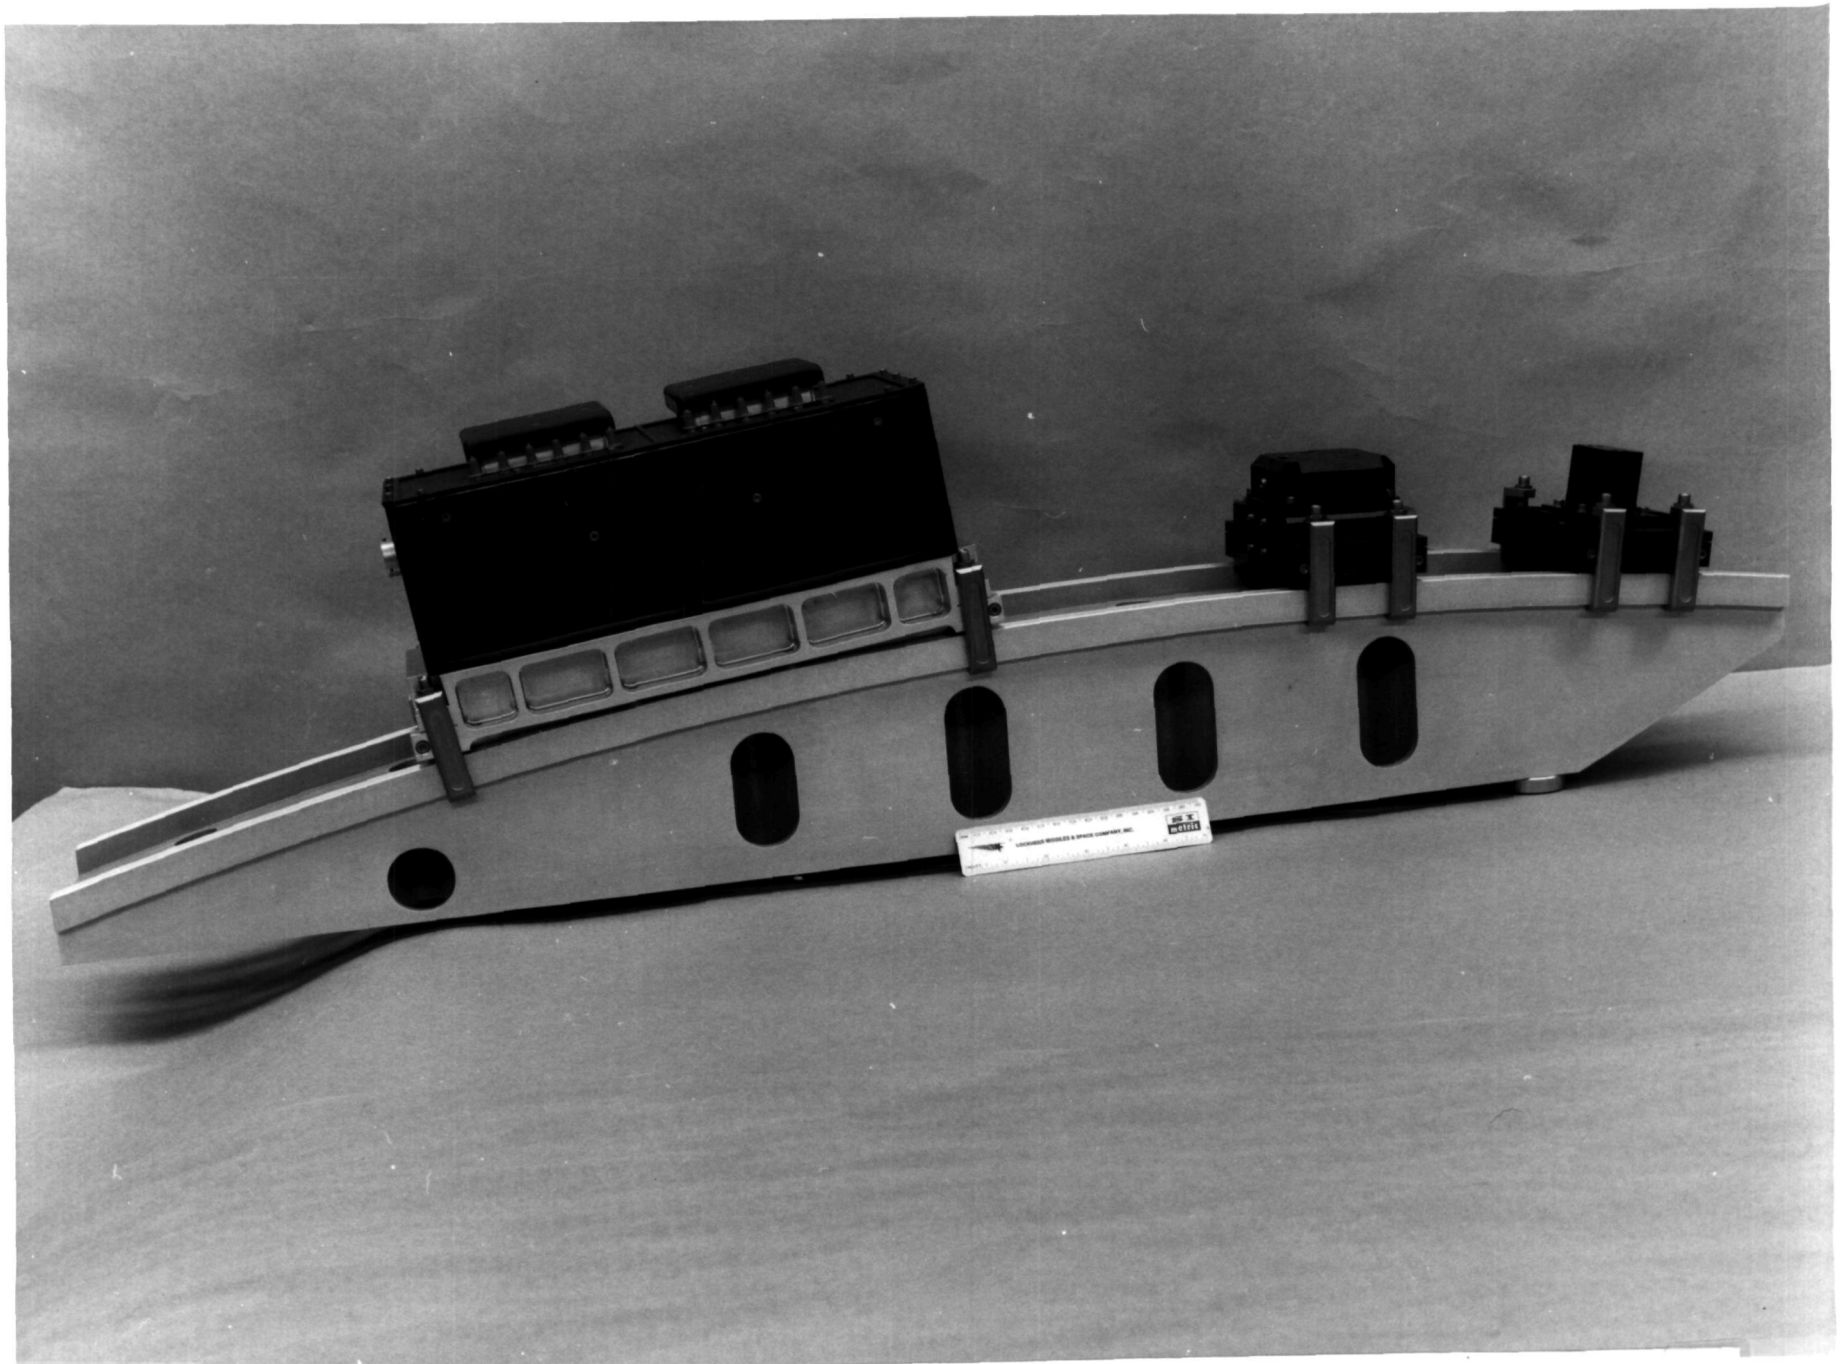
XSST spectrometer assembly showing curved optical rail, detector assembly, grating holder and slit holder. All parts are aluminum except steel clamps which secure them to the rail.
